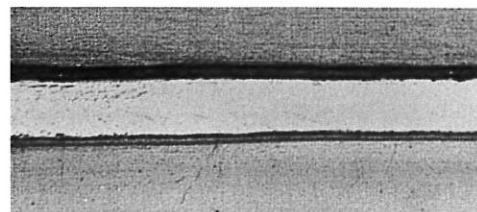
The glossy appearance of DW-308L fillet weld bead.
